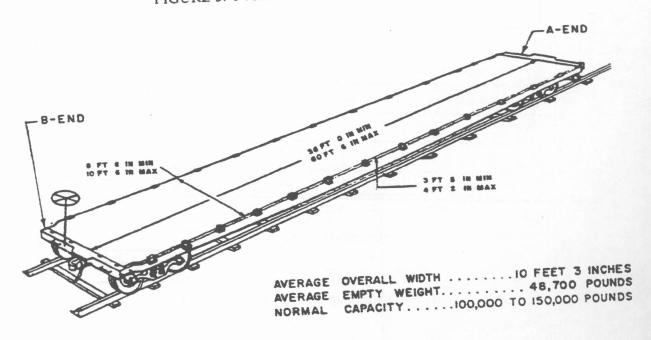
TYPICAL FLATCAR DIMENSIONS
